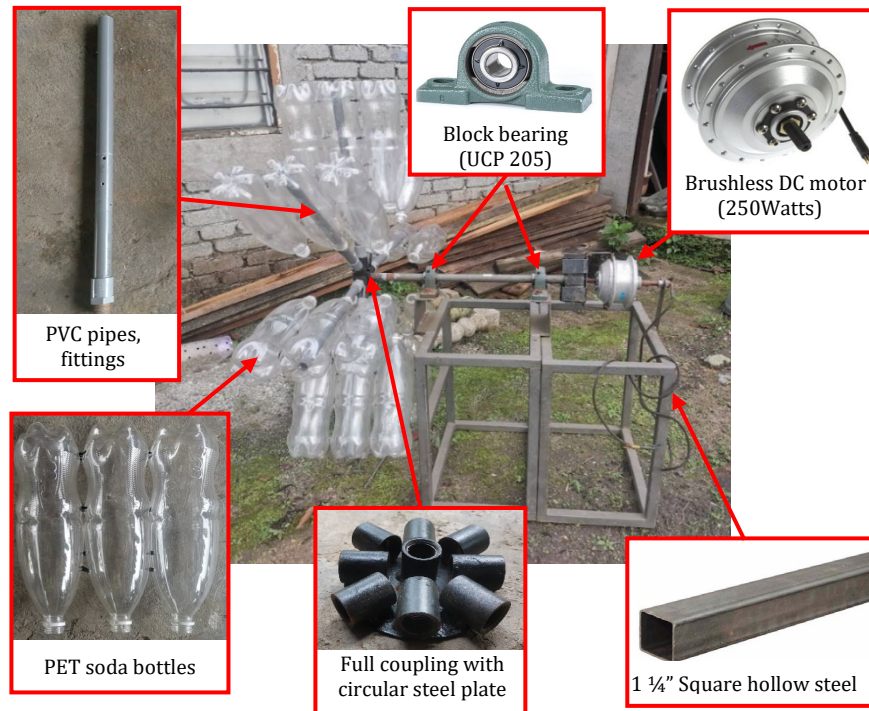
Exploded view of the proposed portable overshoot waterwheel assembly
